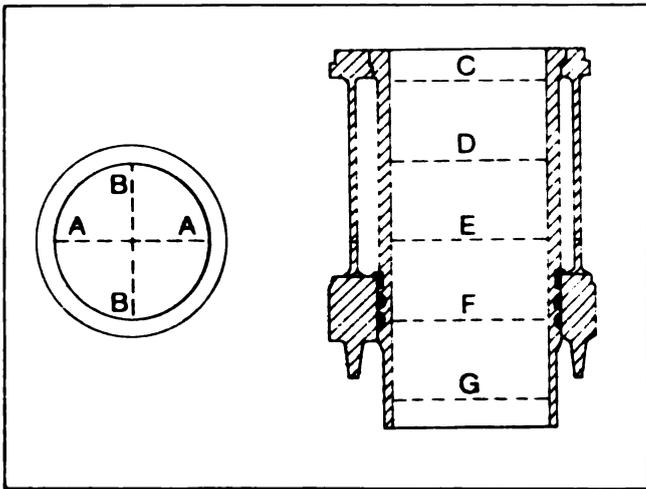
(V401105). Cylinder Liner Check Points.
